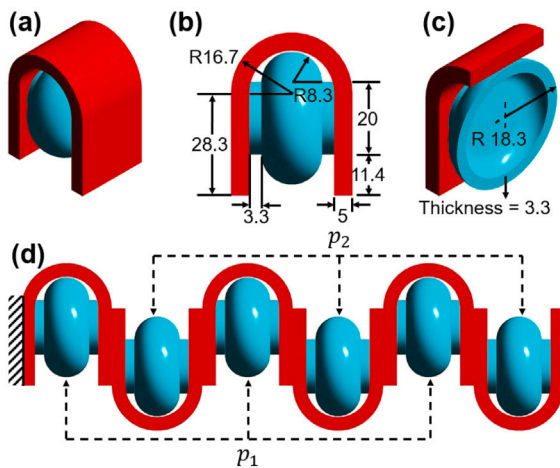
(a) Shows a 3D isometric view of a single unit cell selected for actuator studies. (b) Shows a dimensioned side view of the unit cell. (c) Shows an isometric view of the sliced unit cell. (d) Shows a representative CAD model of a soft robotic actuator composed of multiple alternating unit cells. All units are in mm.
